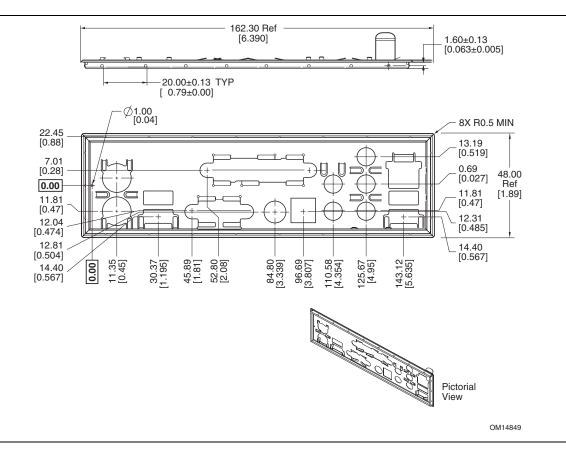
I/O Shield Dimensions for Boards with a 6-Channel Audio Subsystem and Without IEEE 1394a-2000 Connector
